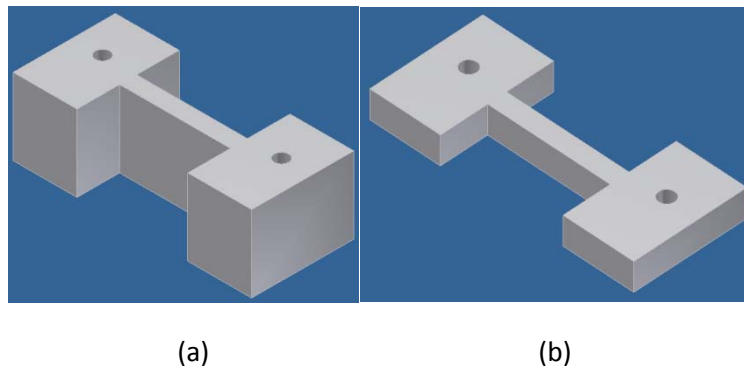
Single cantilever beam clamp: a) bottom piece, b) top piece
